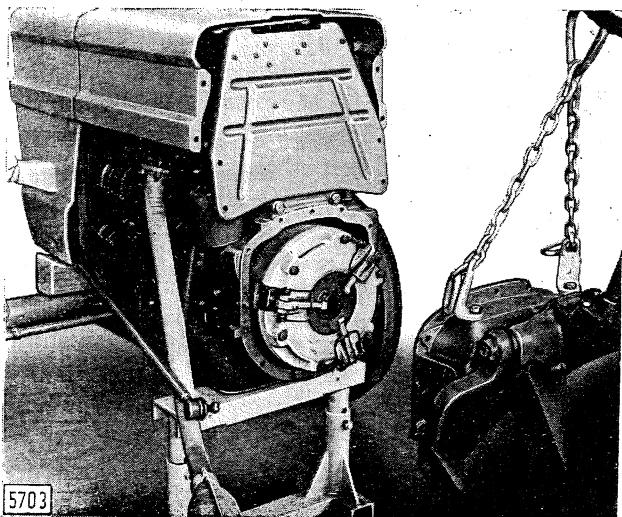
Removing the front axle-engine unit with clutch from the transmission of the tractor
